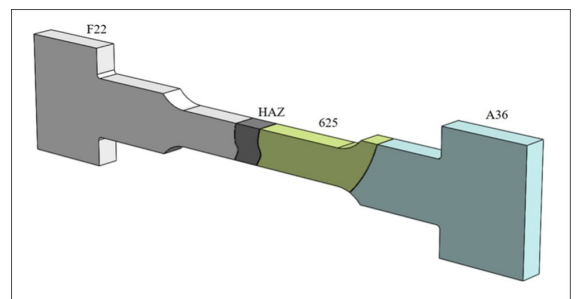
Tension specimen of the welded joint<sup>11</sup>.
